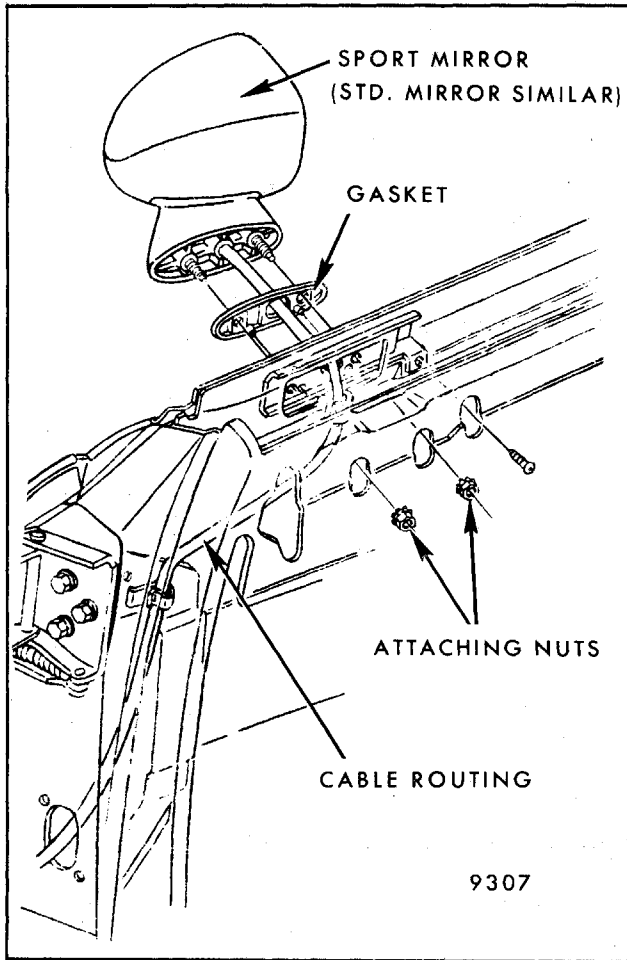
Door Outside Remote Mirror - Typical, All Styles - Right Side
